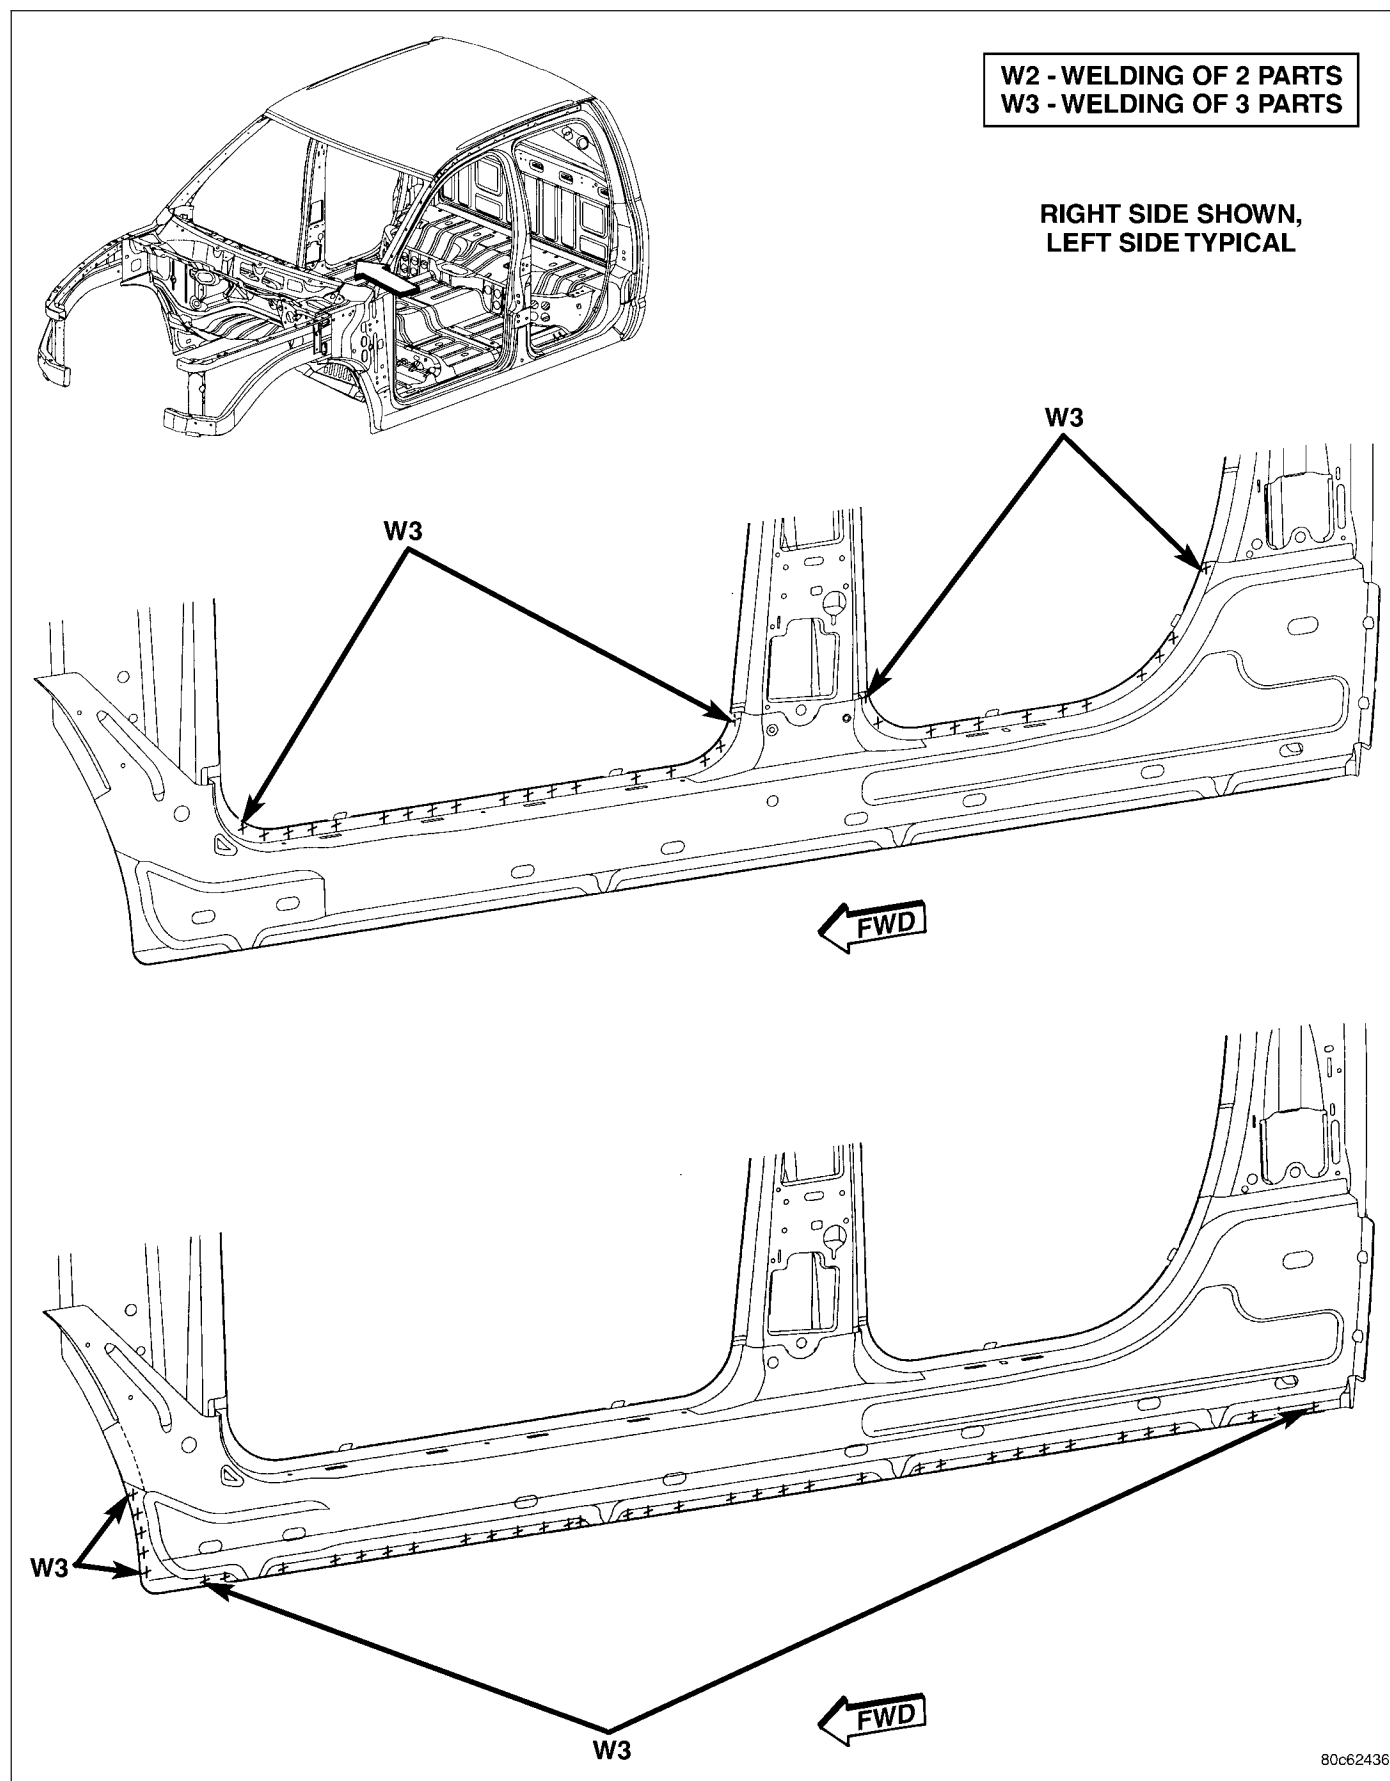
OUTER BODY SIDE APERTURE- QUAD CAB
